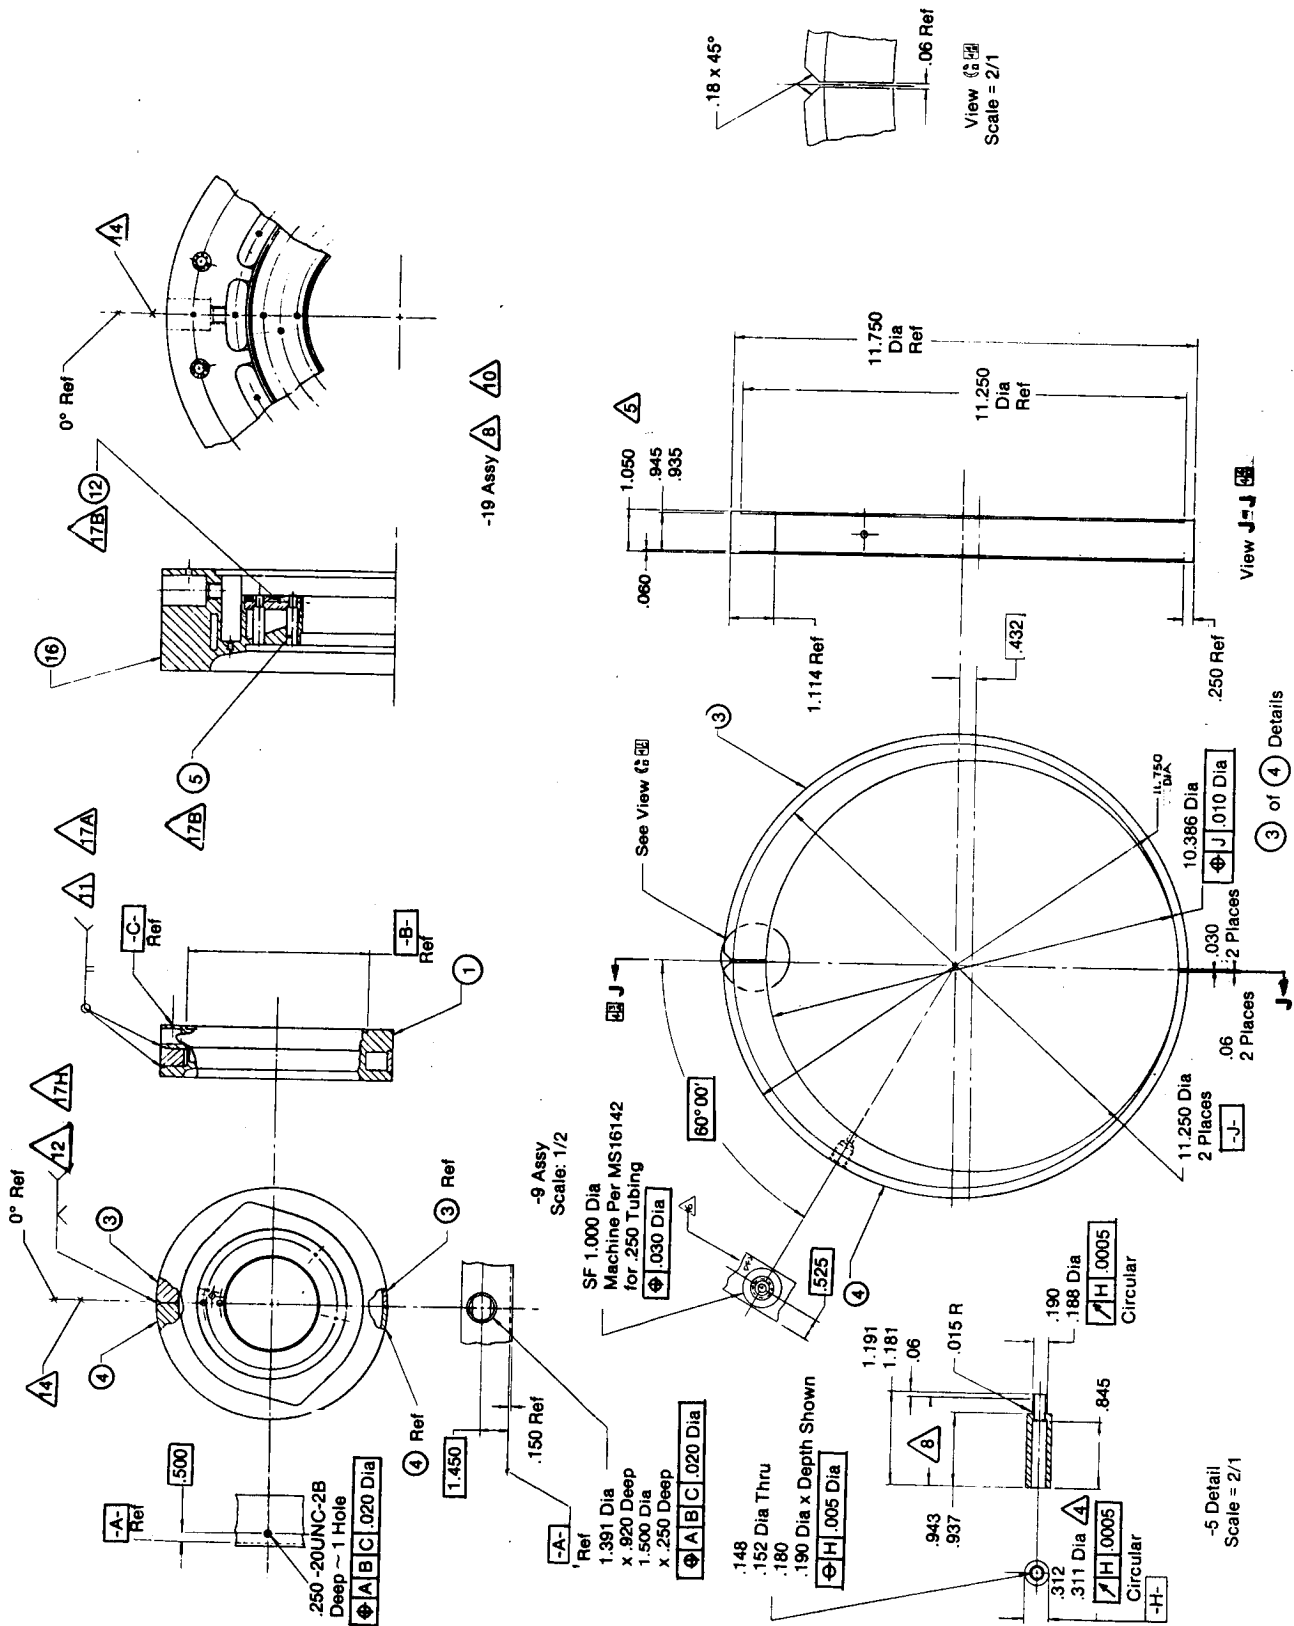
Dual Throat Thruster Secondary Injector Assembly
